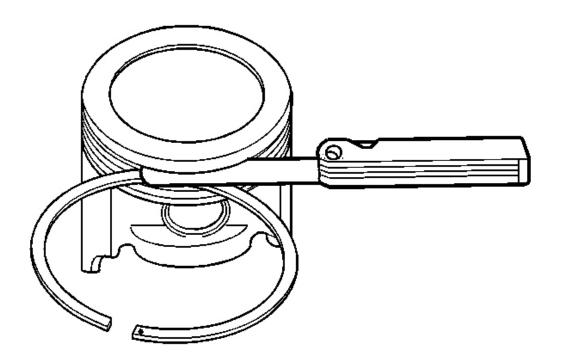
Measuring Piston Ring Side Clearance Courtesy of GENERAL MOTORS CORP.
